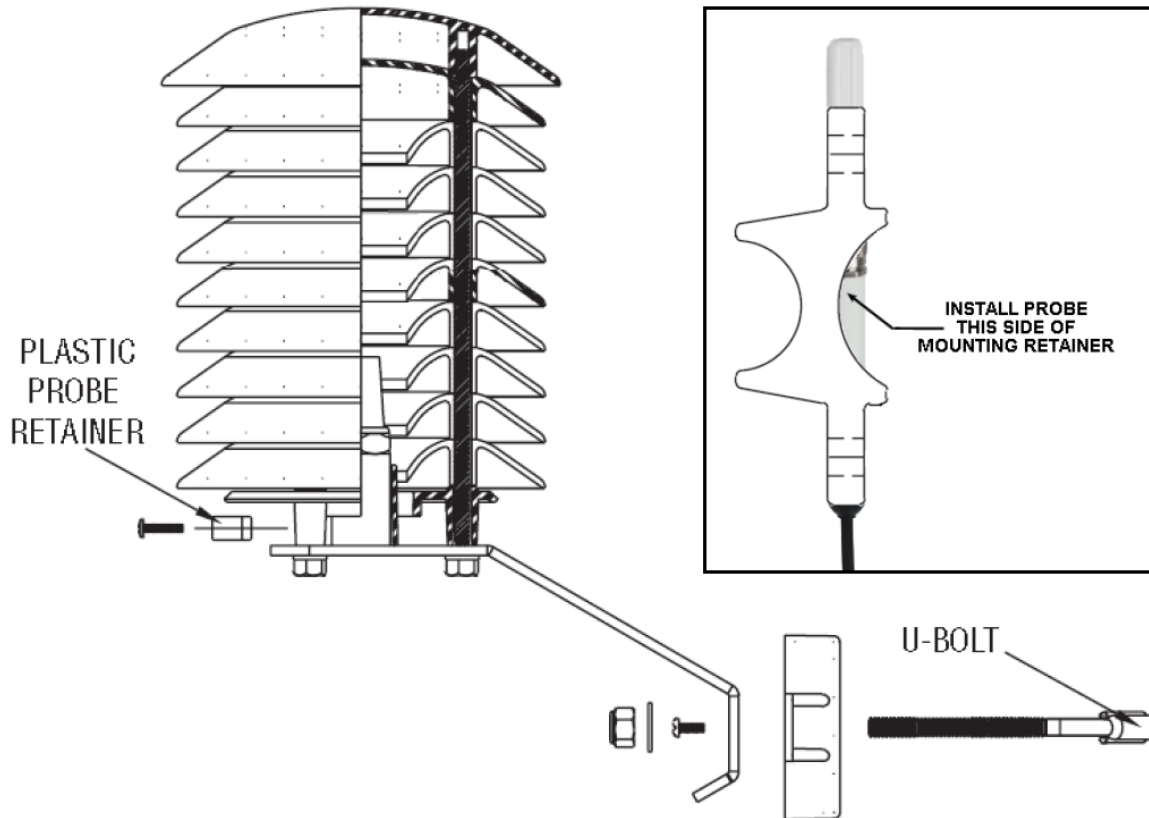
Model 8141-D Dwyer Radiation Shield Mounting Instructions
